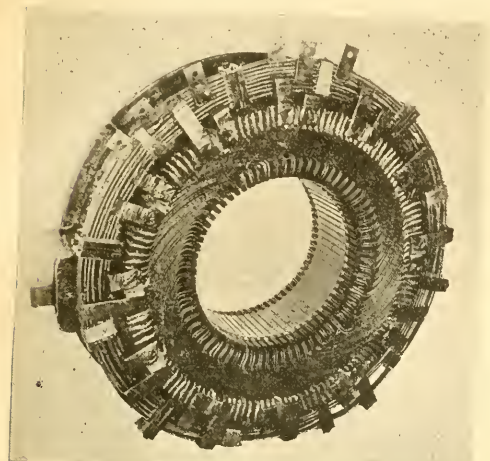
BOTTOM VIEW OF SPINNING MOTOR STATOR
